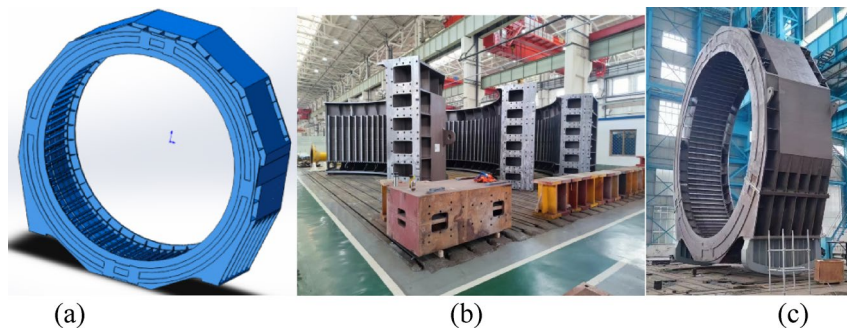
Stator. a 3-D model. b Welded parts. c Assembled stator.
